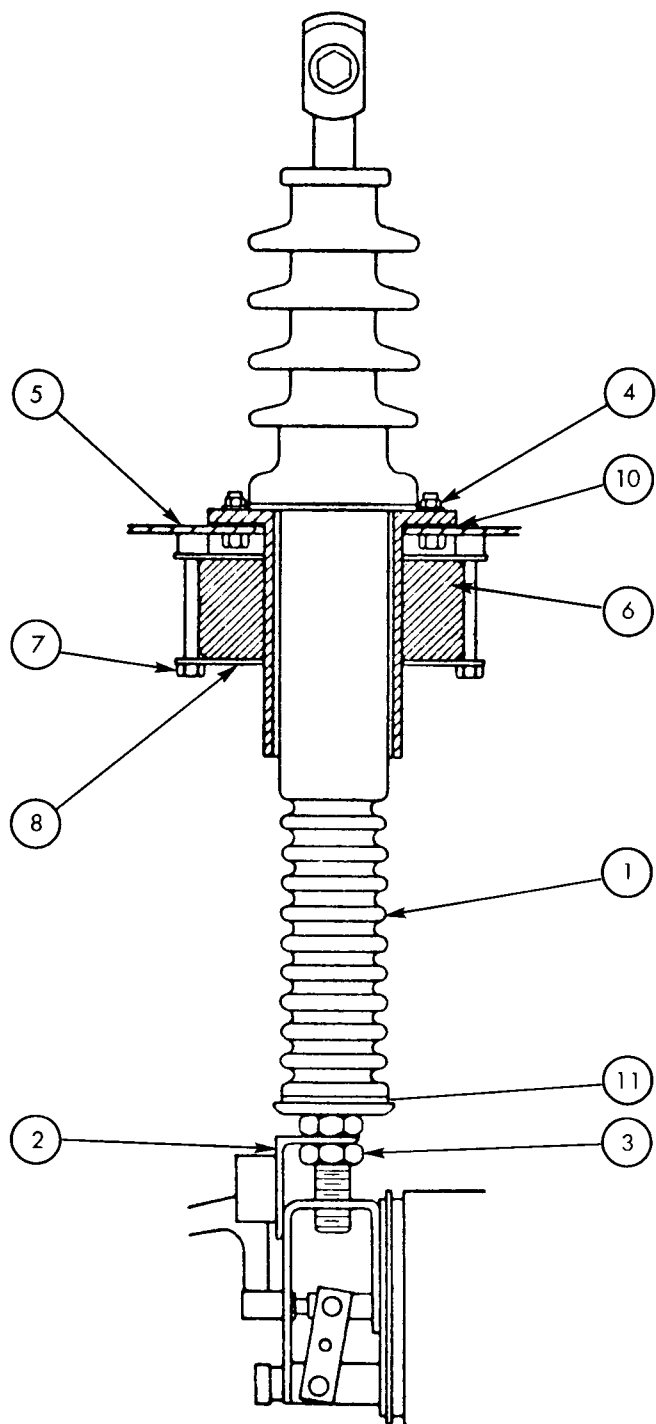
Bushing Assembly and Bushing Current Transformers.
